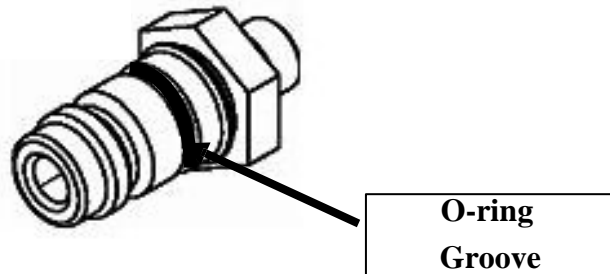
SERVICE FITTING O-RING CAP SEAL
